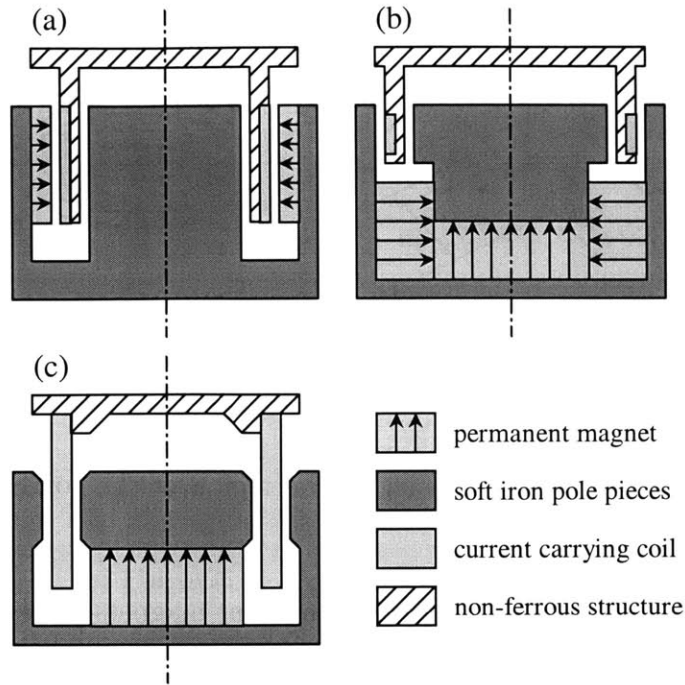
Moving-coil voice coil designs: (a) radially magnetized ring magnet, (b) flux focusing design, (c) bonded windings design (coil is load-bearing)
